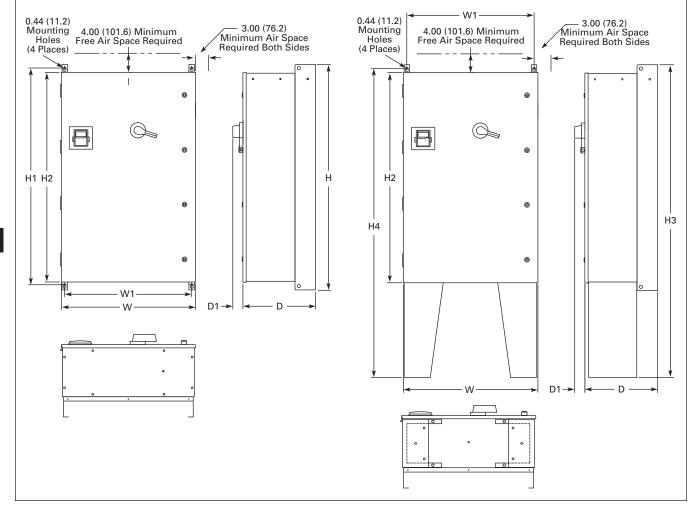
NEMA Type '	12 SVX9000 Pump	Application I	Drive Dimensions
